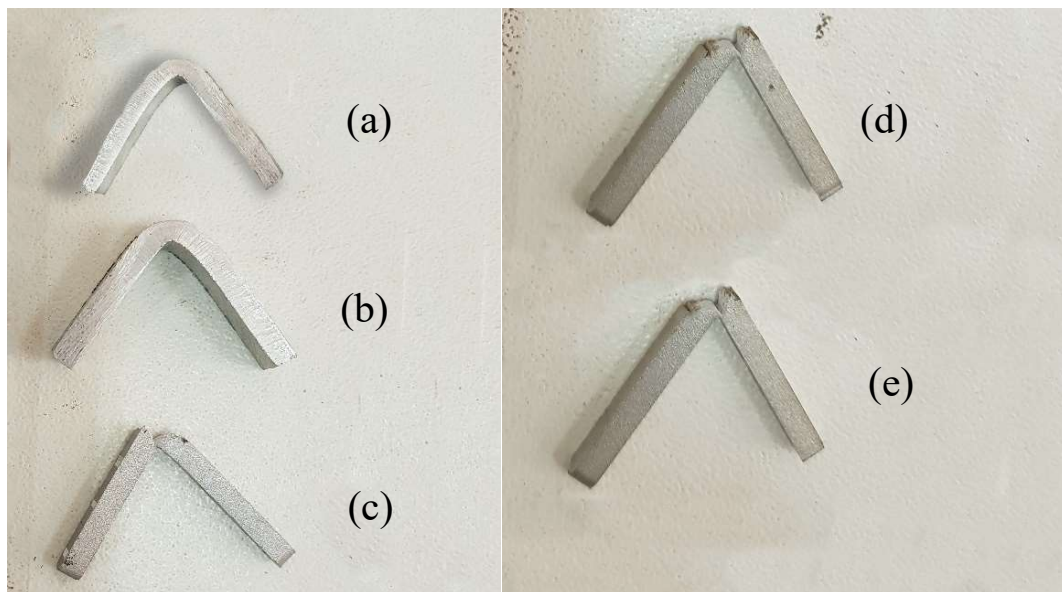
Impact test specimen, (a: 6000, b: 5000, c: 5/6 600, d: 5/6 1000, e: 5/6 1400).
